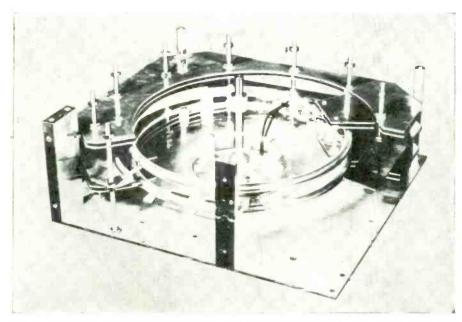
THE COMPLETE OSCILLATOR ASSEMBLY, WITH ONE SIDE FLATE REMOVED. THE MAIN SHORTING CONTACTS ARE STATIONARY, WHILE THE UNIT IS ROTATED
